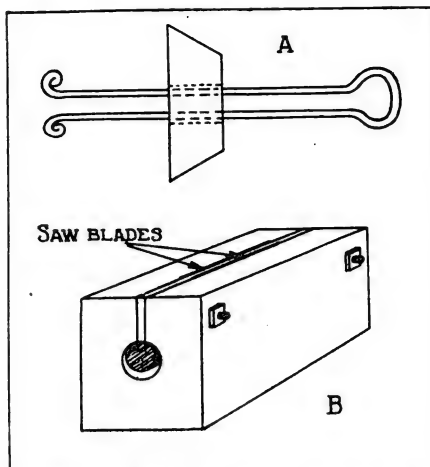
A, Gasoline Gage; B, Device for Cutting Keyways.
